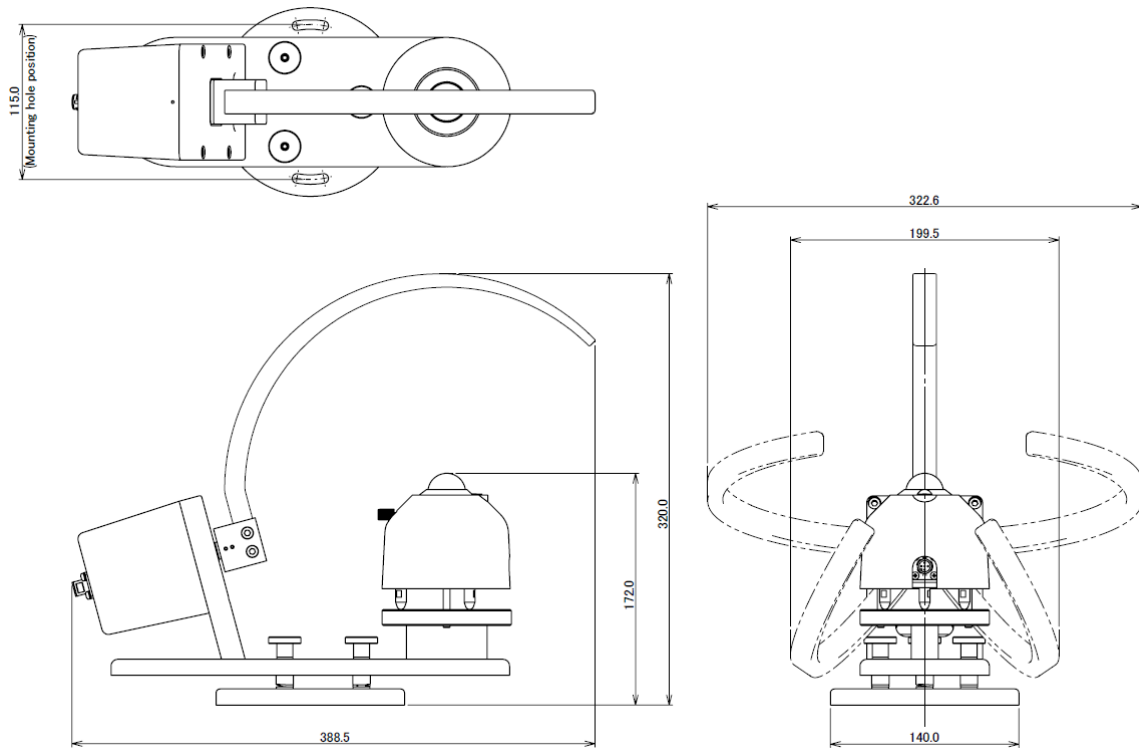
Dimensions of Rotating Shadow Band Main Unit
